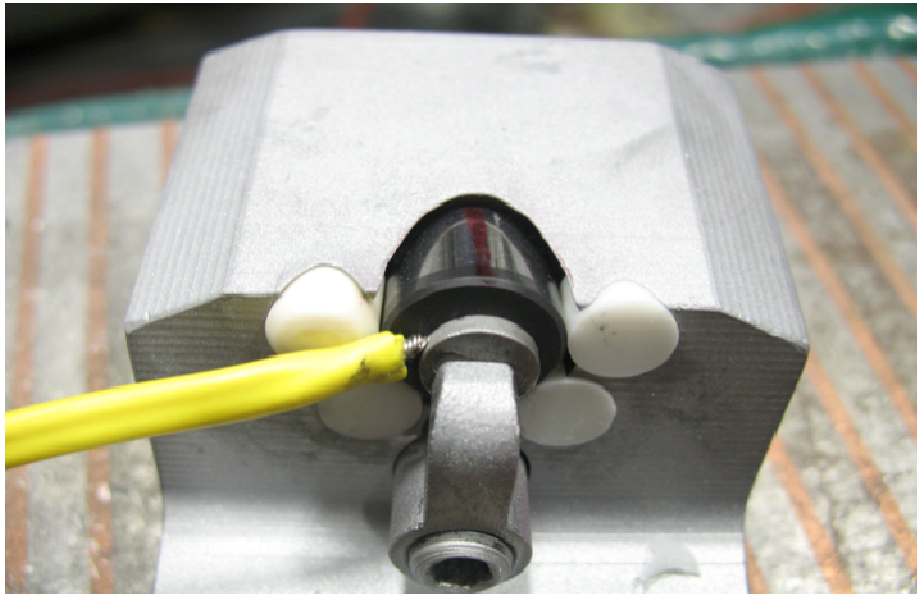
PDC insert clamped into the heavy wear test fixture.
